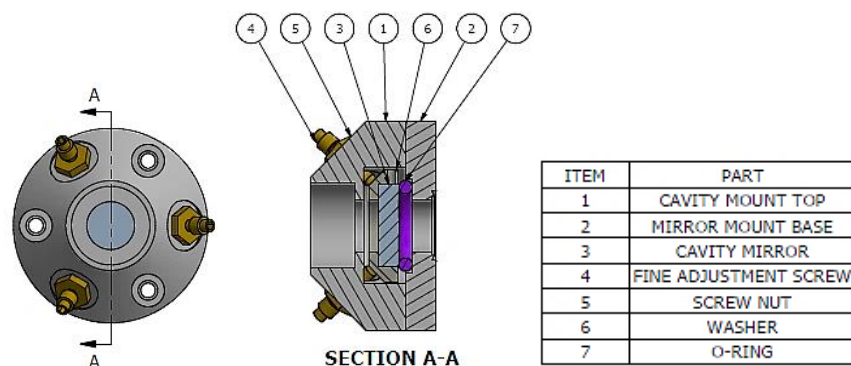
Top view and cross-sectional view of the cavity mirror mount assembly used with the main chamber system of the experimental set-up.
